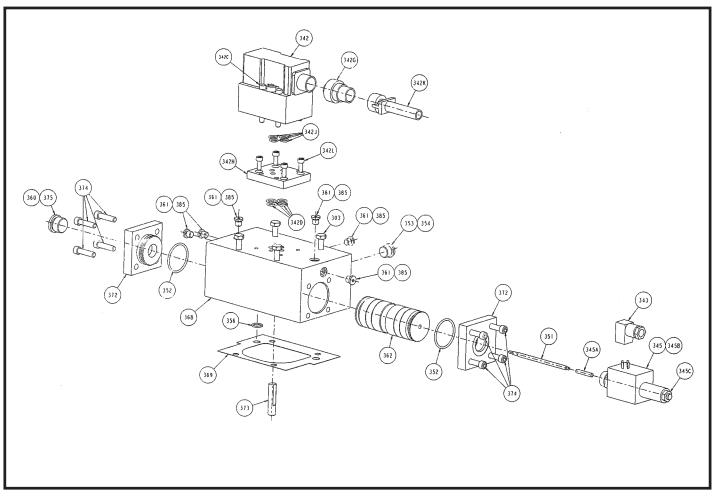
Parts Drawing, VS Control, Exploded View (E51902 sh. 2).
